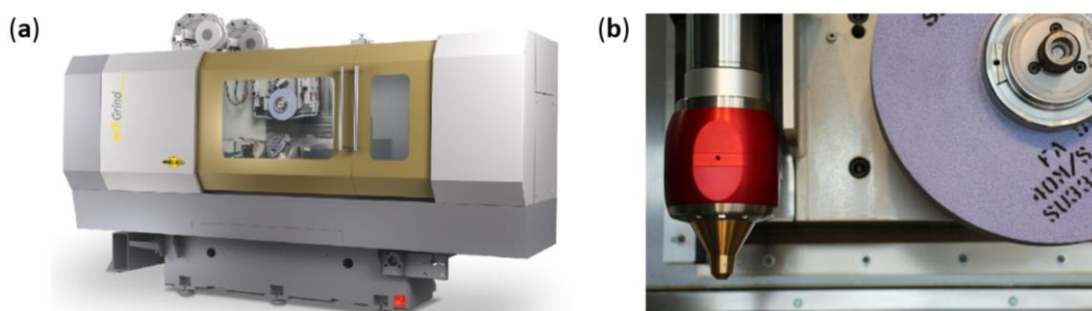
(a) *millGrind* hybrid machine; (b) *Ambit™* cladding head and grinding wheel [Hybrid, 2017].
